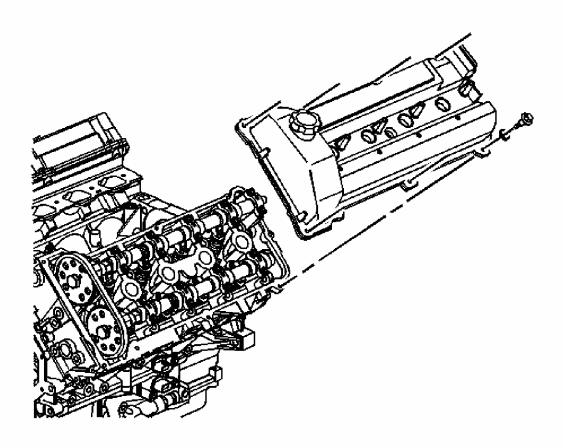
View of Camshaft Cover Courtesy of GENERAL MOTORS CORP.
